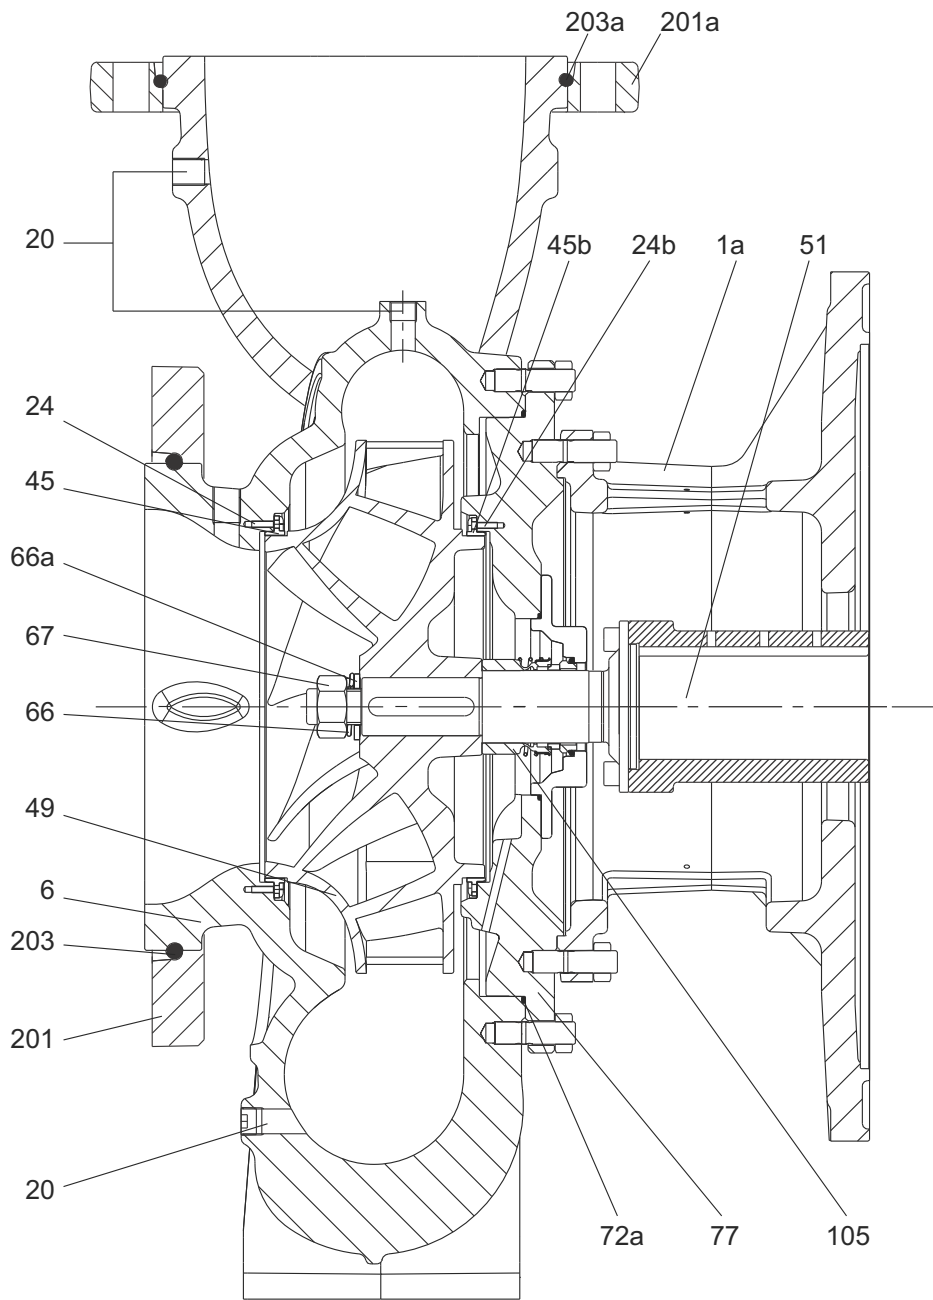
Sectional drawing, tangential outlet, DN 250 and DN 300
